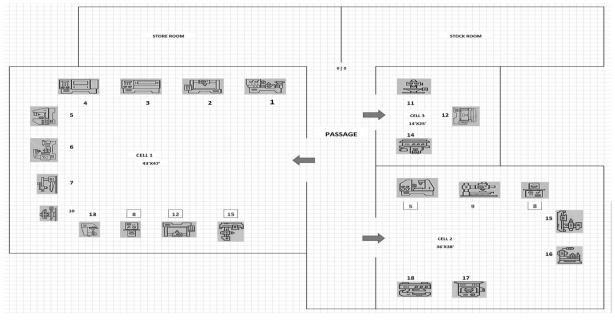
Cell layout design for Bench mark problem 6-18machines x 24 components Bench mark problem
